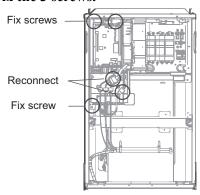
Install PCB and Reconnect Connector; Fix Screws
